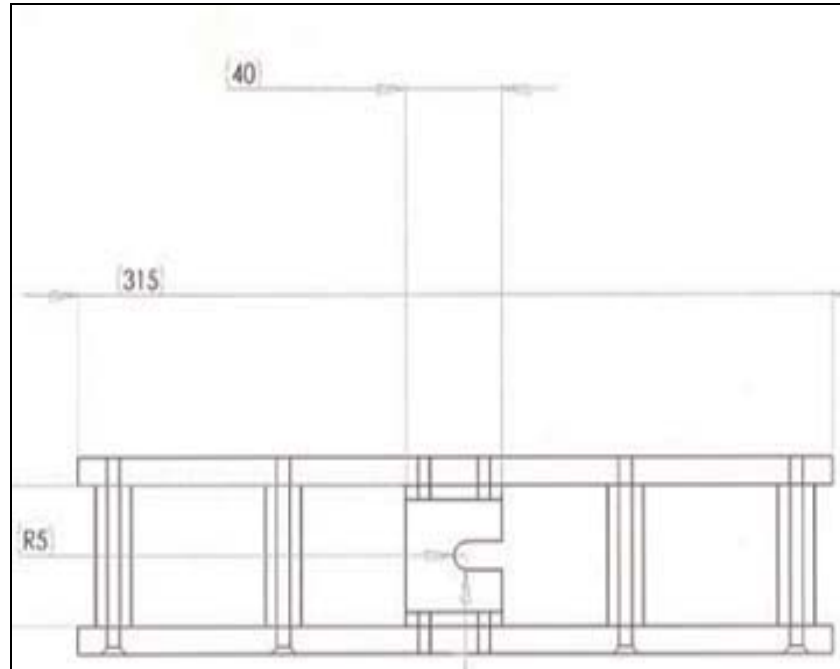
SolidWorks® drawing of a burst chamber: side view.
